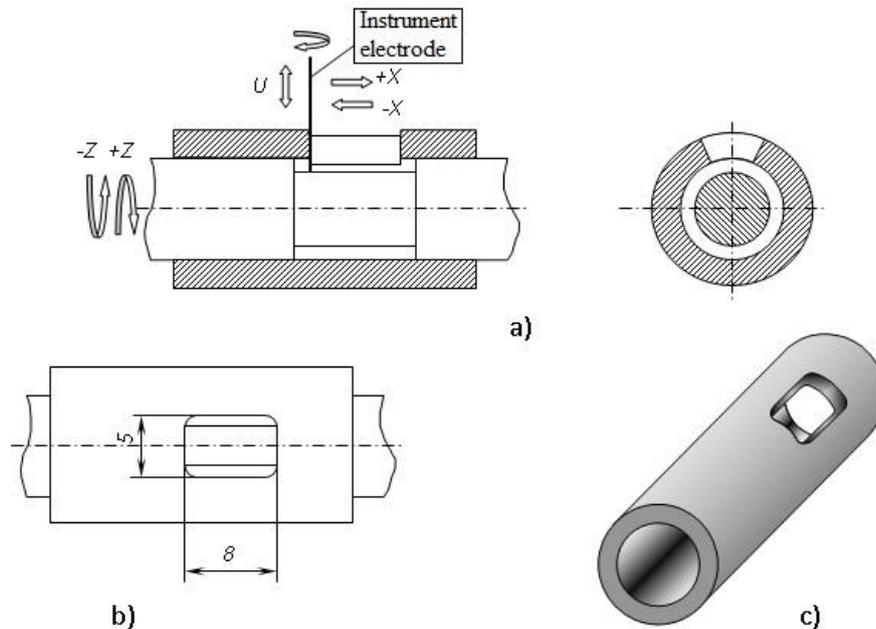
Cutting out a hole in a tubular part: (a) processing scheme; (b) sketch of the treated surface; (c) tubular part with cut out hole
